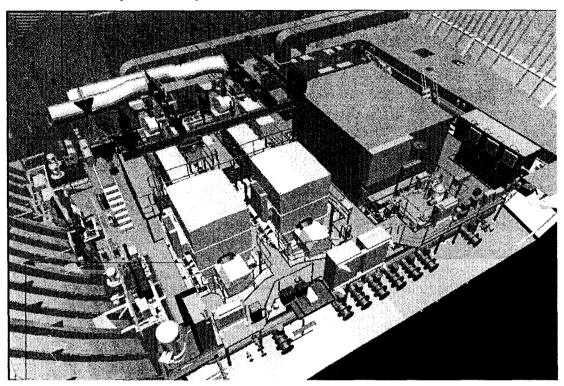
FORWARD AUXILIARY MACHINERY ROOM CAD MODEL
